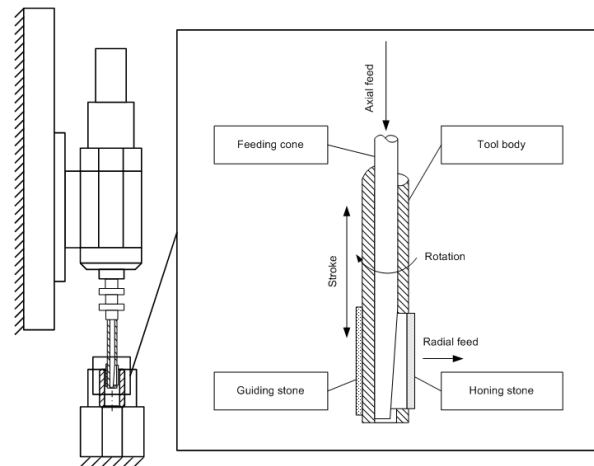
Movement components of honing and cut through a single stone tool according to [6]
